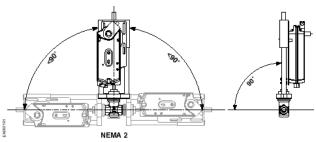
Acceptable NEMA 2 Mounting Positions. Wiring.
